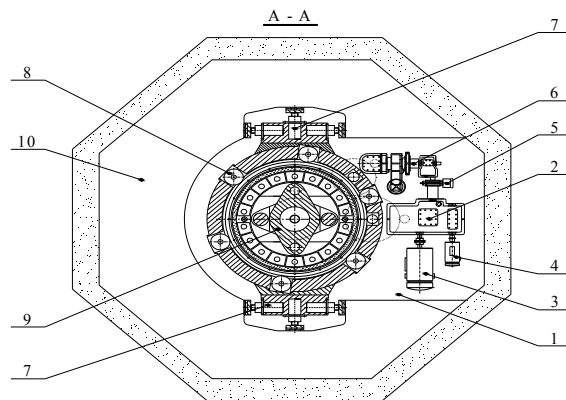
Arrangement of side rollers in the azimuthal axle lower bearing and the azimuthal rotation drive. 1 - fixed support platform; 2 - the gear reducer; 3, 4 - fast and slow rotation DC motors; 5 - electromagnetic brake; 6 - backlash compensation mechanism; 7 - assembly-adjusting hydraulic jacks; 8 - side rollers of the azimuth axis lower bearing; 9 - crossing joint of the vertical axle column (azimuthal rotation) and a fixed base platform; 10 - intermediate reinforced concrete floors.
